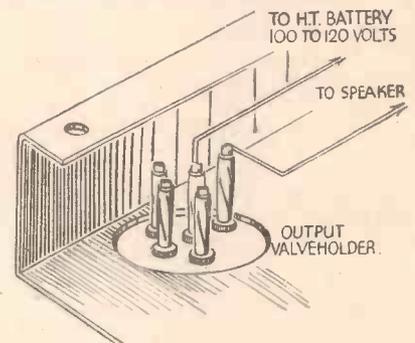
Five-pin valve-holder wired for battery pentode.
